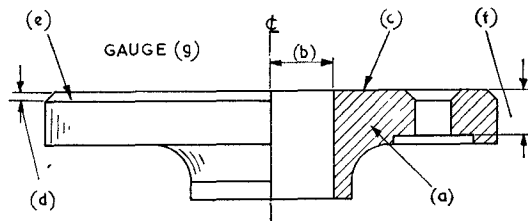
Typical parameters requested on a drawing; (a) material, (b) toleranced dimensions, (c) surface texture, (d) flatness and squareness, (e) chamfers on mating face, (f) spot facing, and (g) use of inspection gauges.
